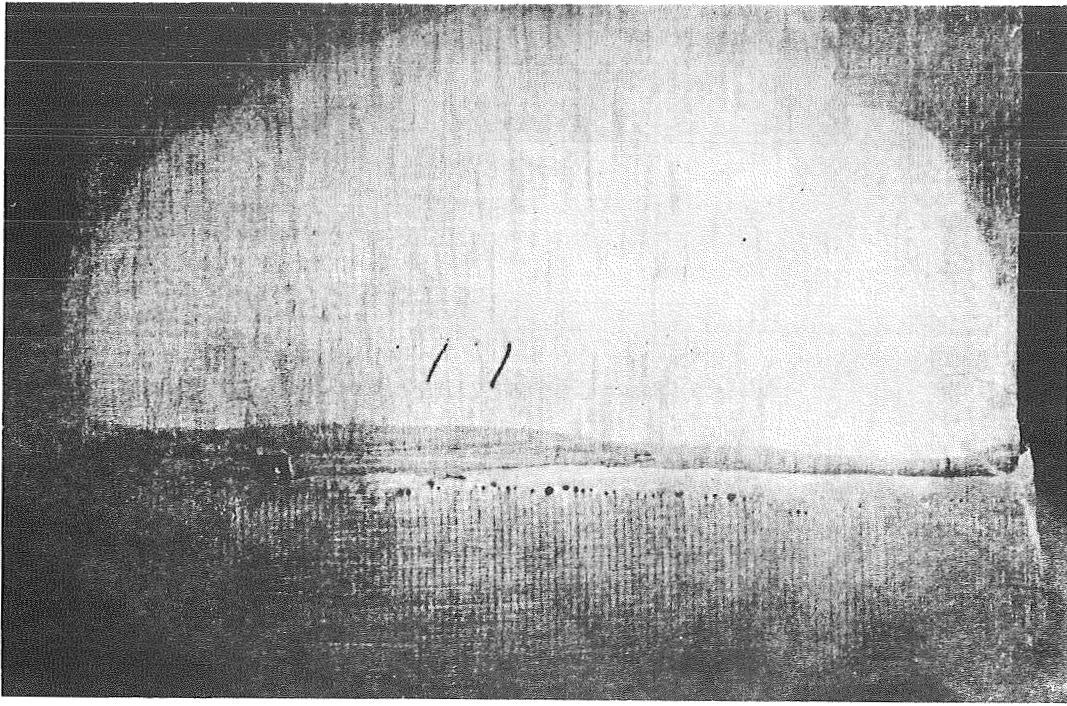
B: Titanium Hydride killed TIG welded edges of B3E20L lamination with subsequent Electron Beam weld to AISI 4620 block.
